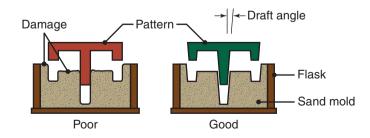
Taper on patterns for ease of removal from the sand mold.
